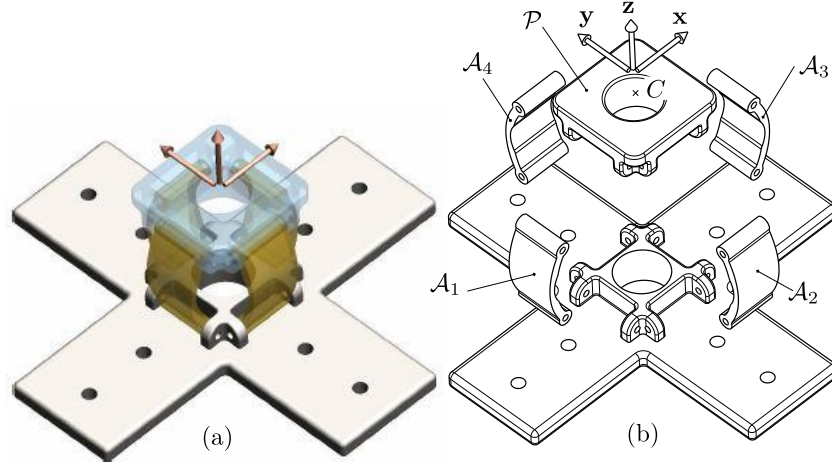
Compliant Sarrus mechanism (a) CAD view (b) exploded view.
